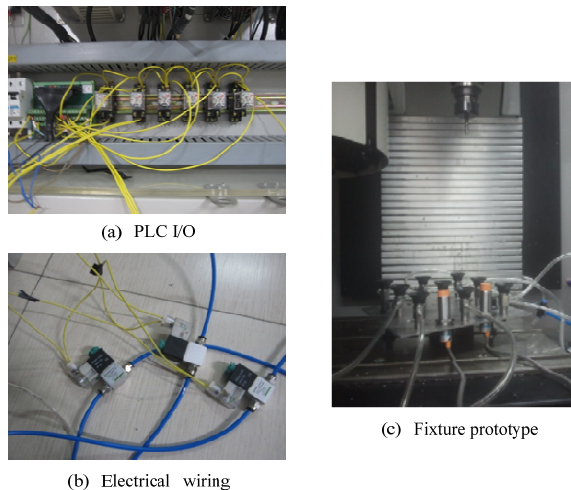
Prototype of the intelligent vacuum adsorption fixture.
